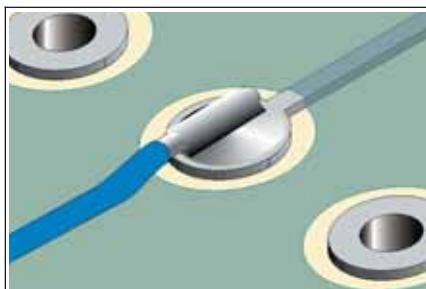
Acceptable Wire soldered to component end, lifted off pad.
